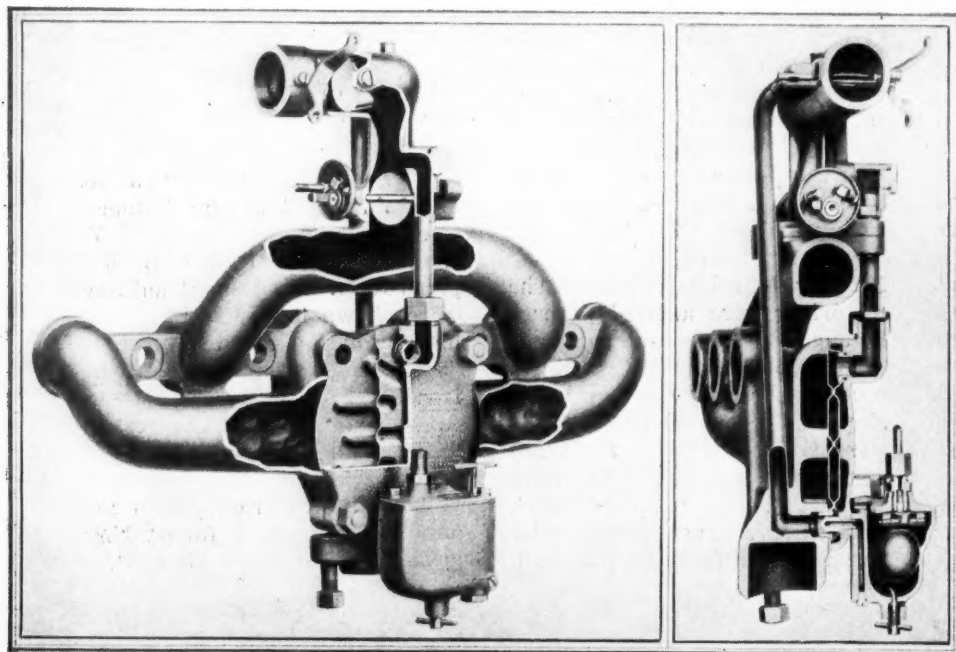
(left)—Side view of new Holley vaporizer. Cut-away sections indicate construction of heating chamber, auxiliary air valve and throttle
